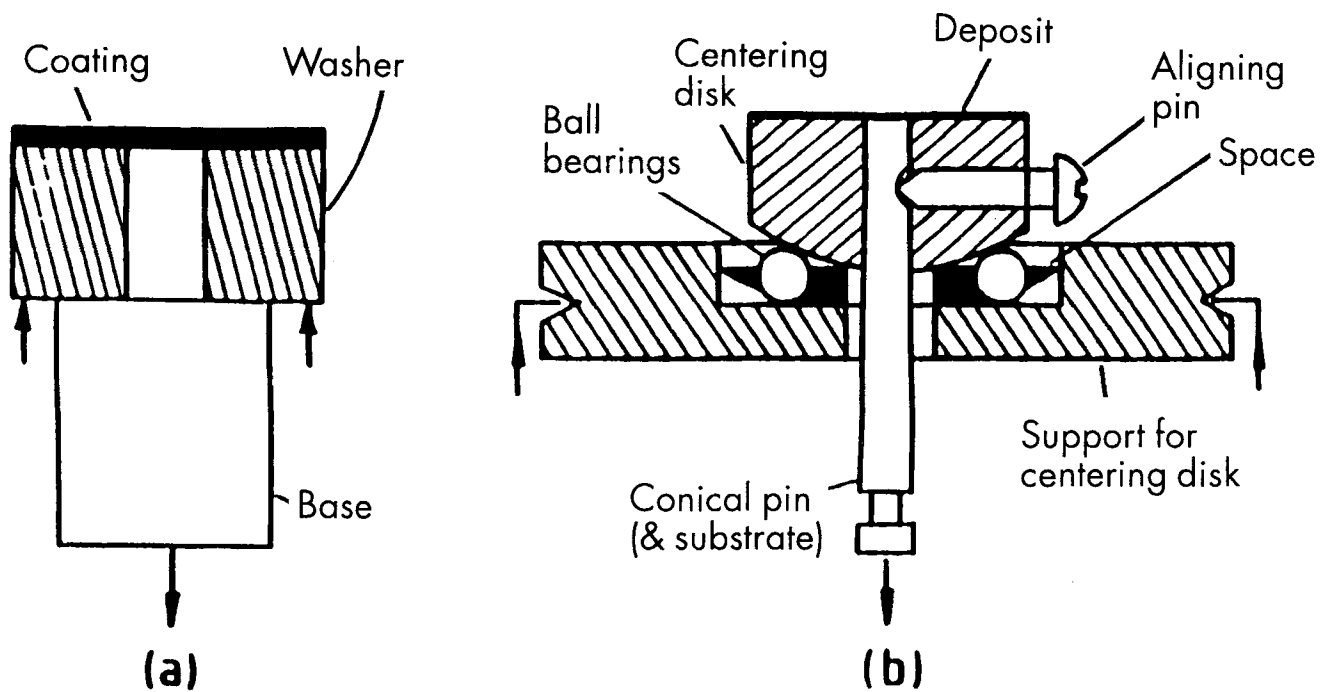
(a) Specimen for determining adhesion strength. (b) Centering device and specimen in cross section. Source: Ref 28
